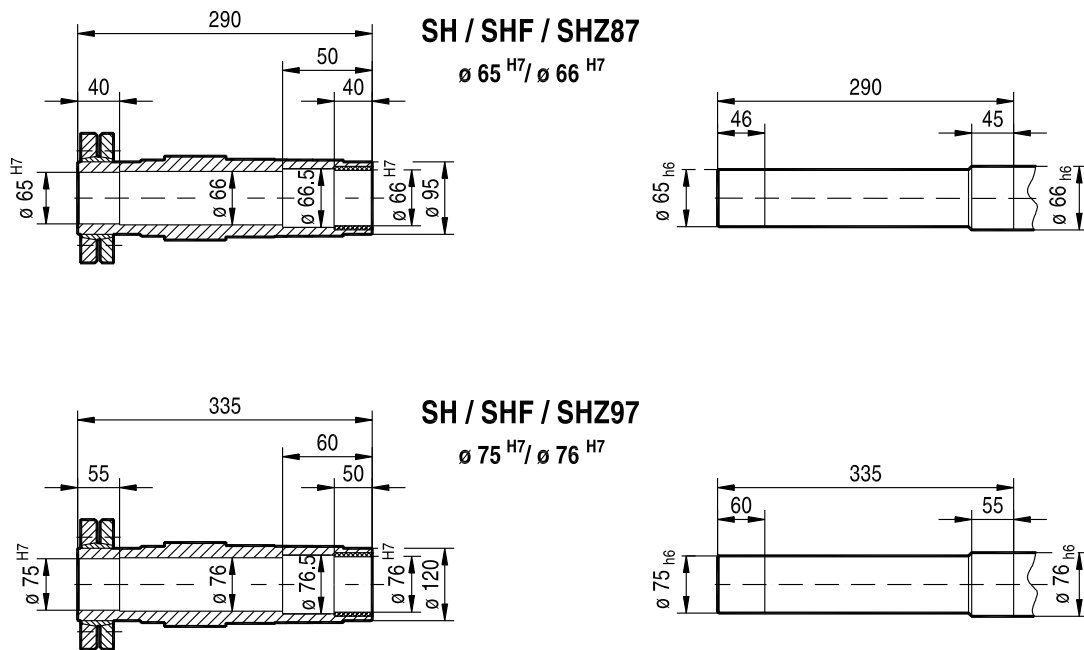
Shouldered hollow shaft SH/SHF/SHZ87...97
